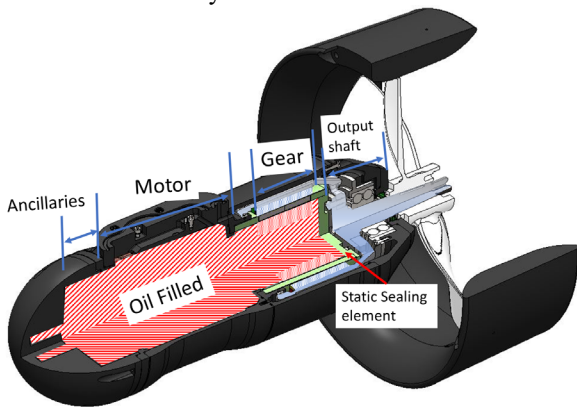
Cut away section of motor showing key components and hermetic sealing arrangement.
